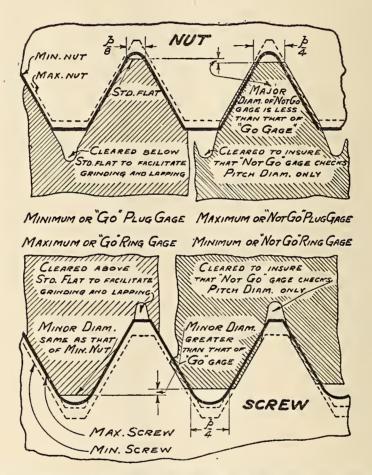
Thread form of "go" and "not go" thread plug and ring gages NOTE.—"Not go" gages check pitch diameter only.
